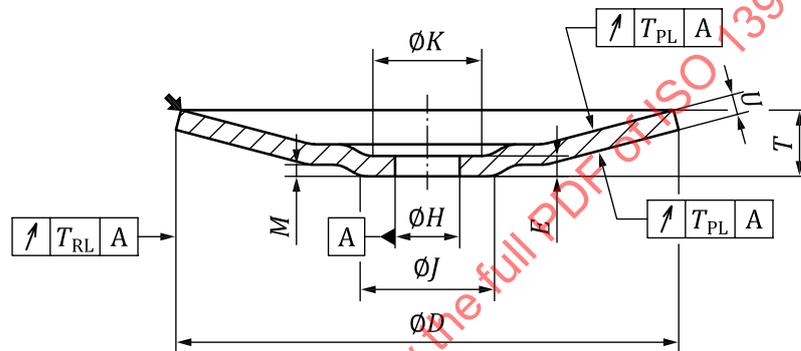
Depressed centre grinding wheel, concave shaped (Type 28)
